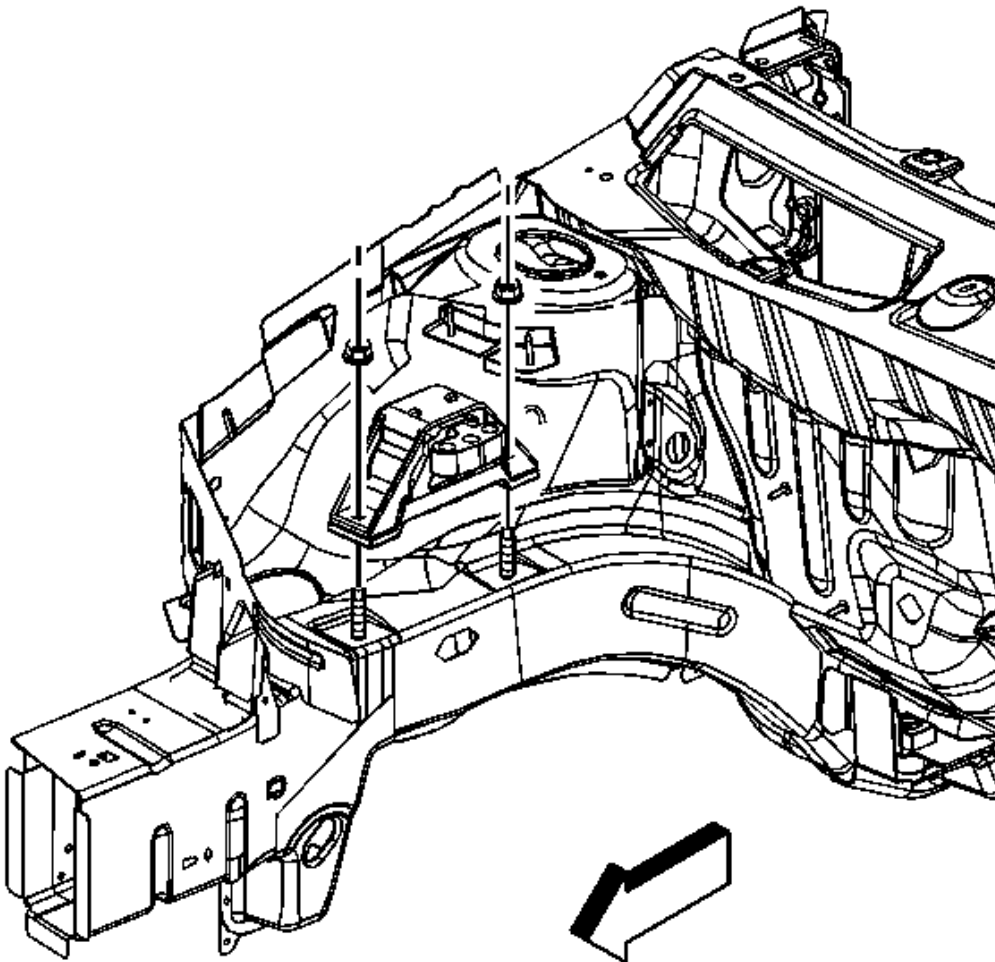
View Of Right Engine Mount To Frame Rail Nuts
